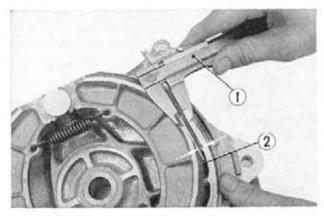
① Vernier caliper ② Rear brake shoe
